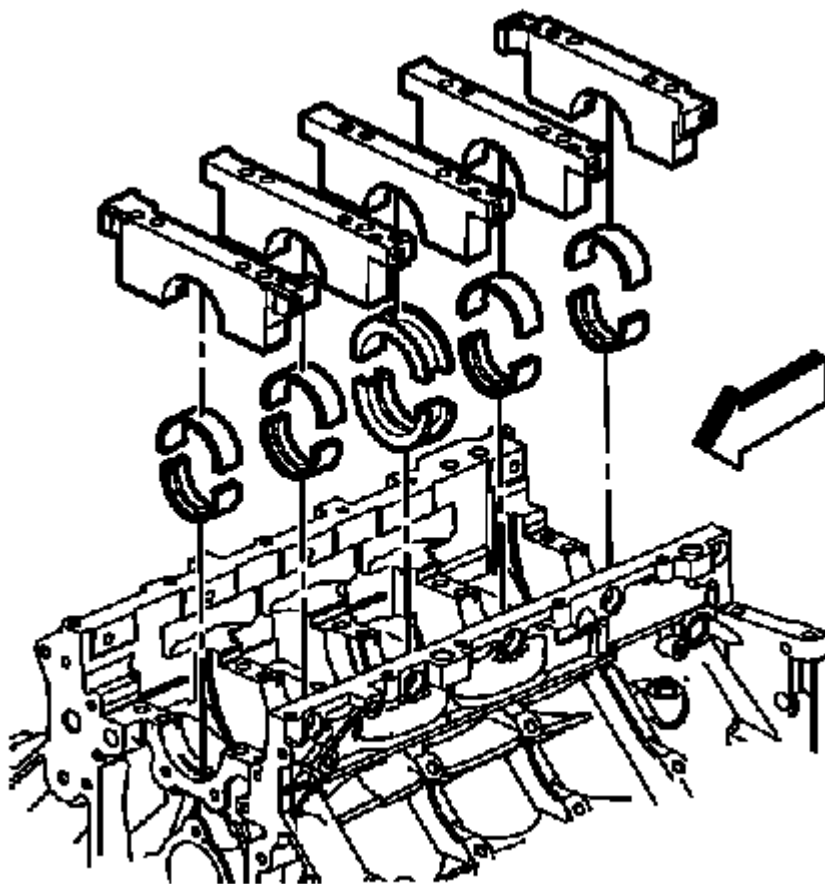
View Of Crankshaft Bearings & Bearing Caps
